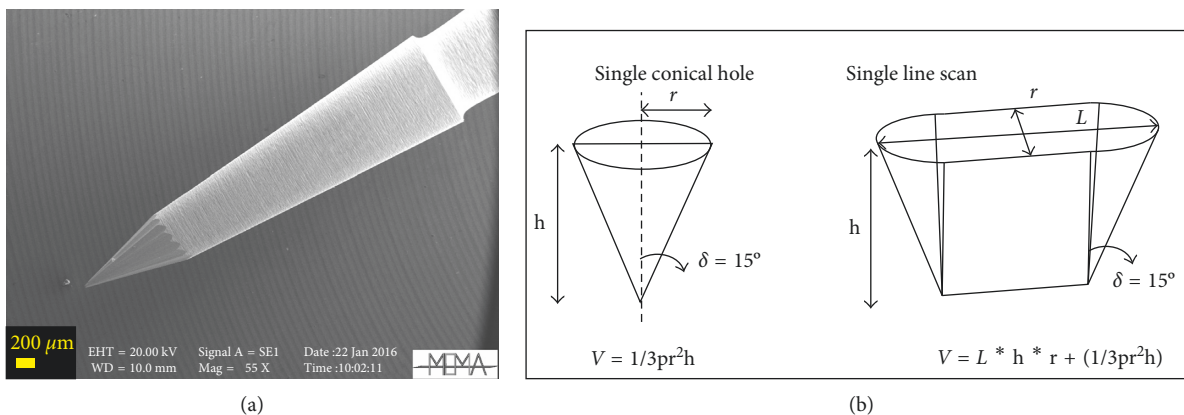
(a) SEM imaging of a tungsten carbide drill bit used for milling: the tip angle is 30° and geometrical shape of (b) a single conical hole and single line scan.
